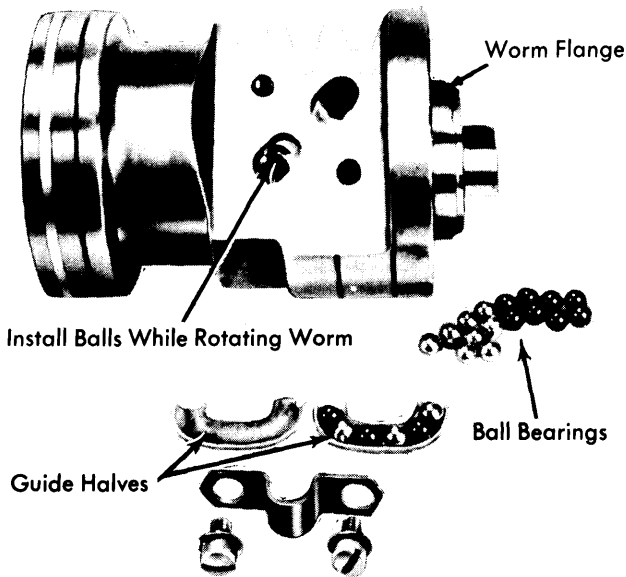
Installing Ball Bearings into Rack-Piston Assembly
